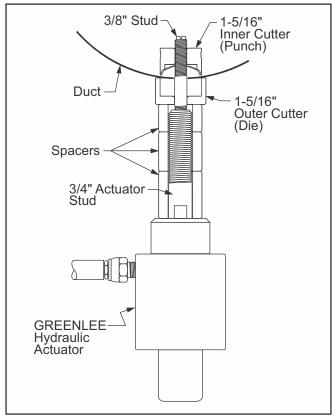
1-5/16" Hydraulic Punch Configuration
